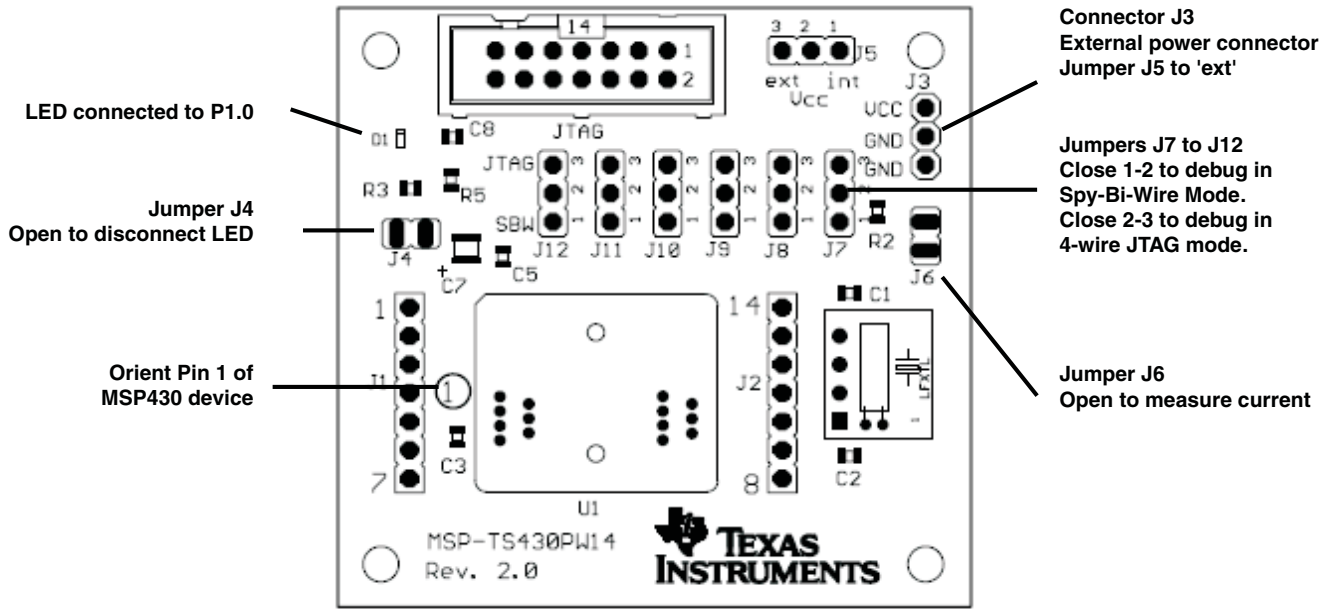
MSP-TS430PW14 Target Socket Module, PCB
